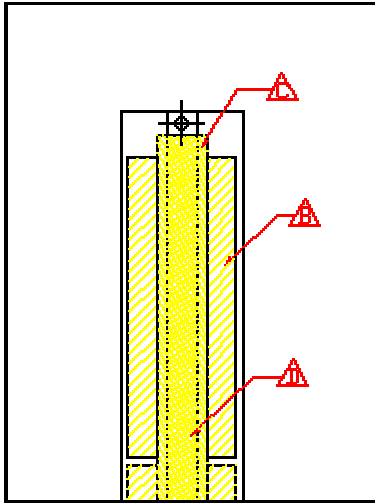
A close-up of the deployed panel showing the solar cells (B) adhered with silicon adhesive (C) on both sides of the same pc board backing (D).
